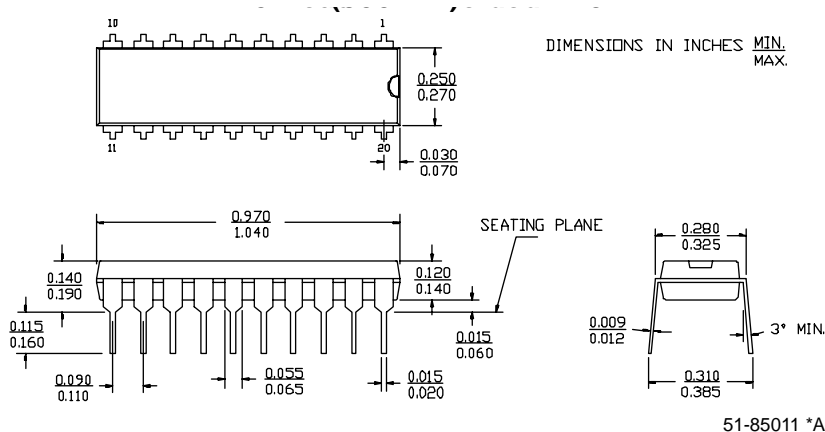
20-Lead (300-Mil) Molded DIP
